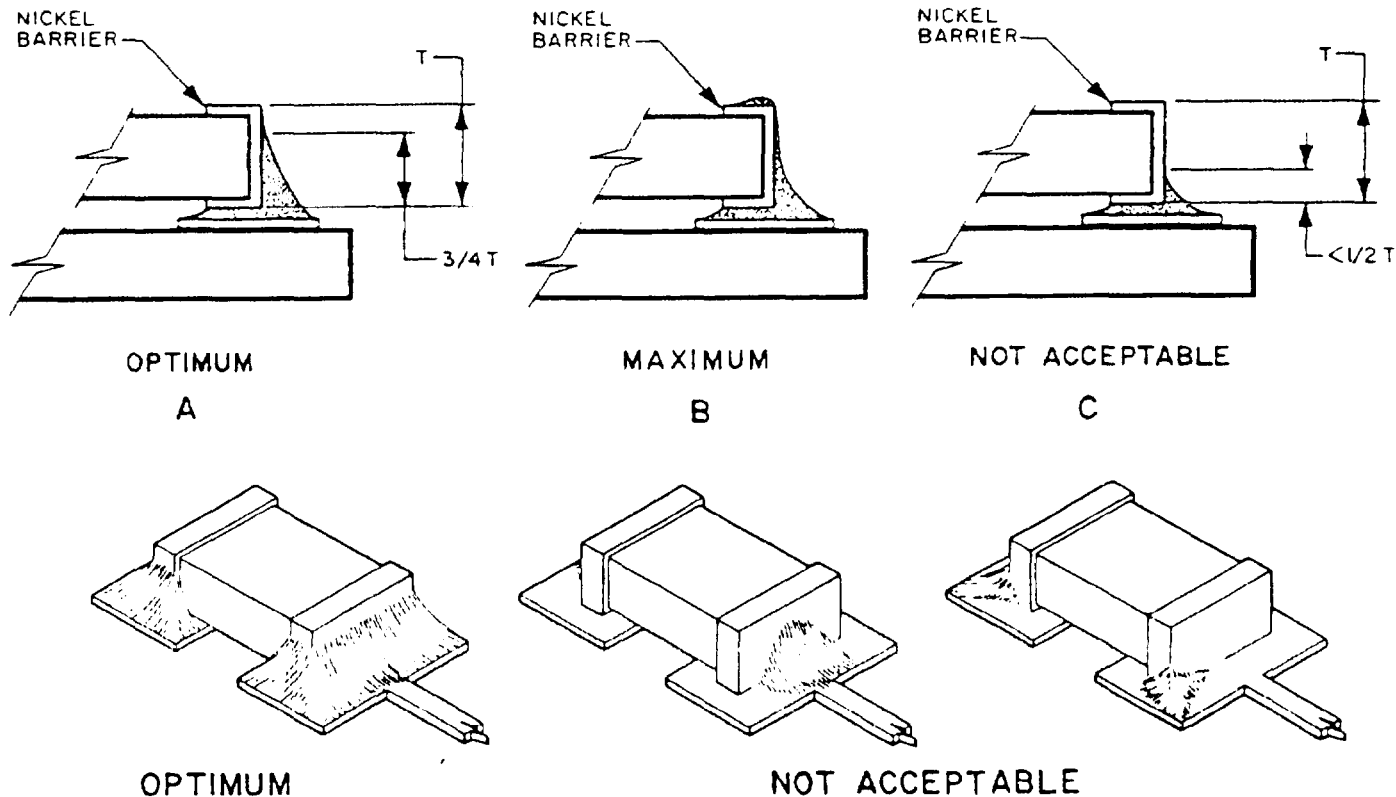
Solder filleting (see 5.4.21.17.5).
